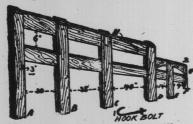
FIG. I-CATTLE RACK FOR WAGON. made of hard wood. Slats A, B and D are 3 inches wide; slat C, 1 inch wide; all double. Slat E is single, placed outside, 3 inches wide, 21/2 feet long. Slat F is also single, placed inside, 2 inches wide and 16 inches long; this slat is to rest on top edge of wagon box and to hold front end gate when used as a hog rack. Slats are spaced apart as given in Fig. 1. The cut out board G, for placing on your wagon seat, is slid in between double slat D and bolted to slats E and F. Nailed near the top on the inside of rack and in front of slat C is a hard wood block (H) ½ by 18 inches; it is used to prevent the stanchion from being pulled down backward. Use ordinary end gates and end rods for the rack in either end.
